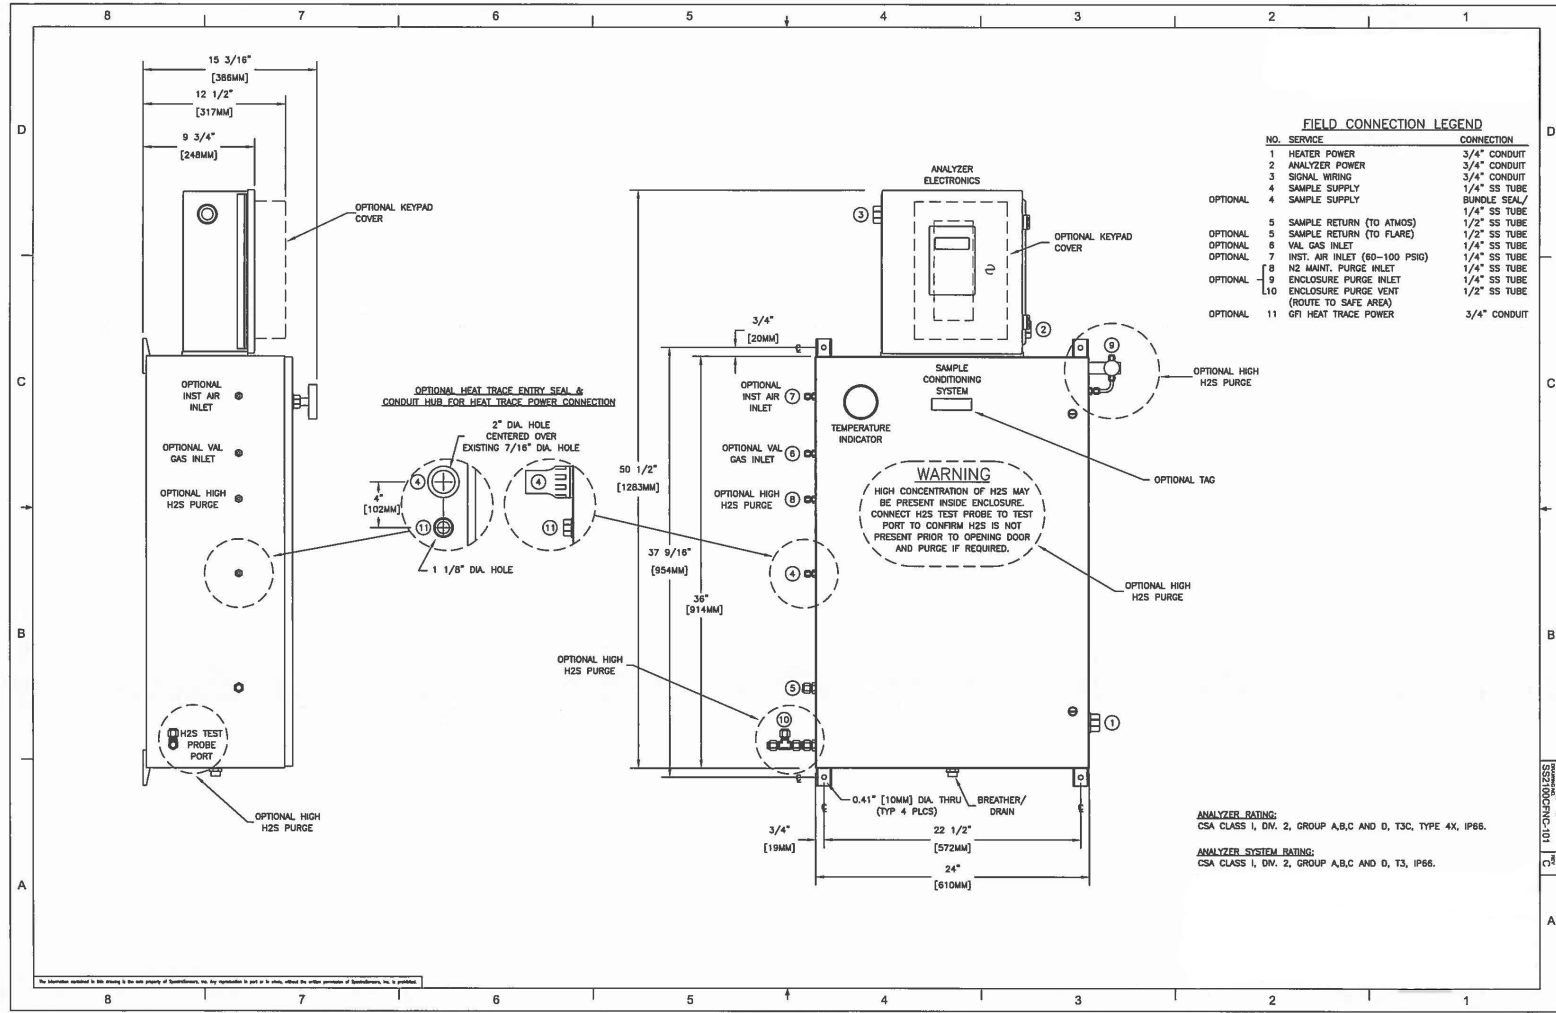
Outline and mounting dimensions (front view) of SS2100 for H<sub>2</sub>S analyzer
